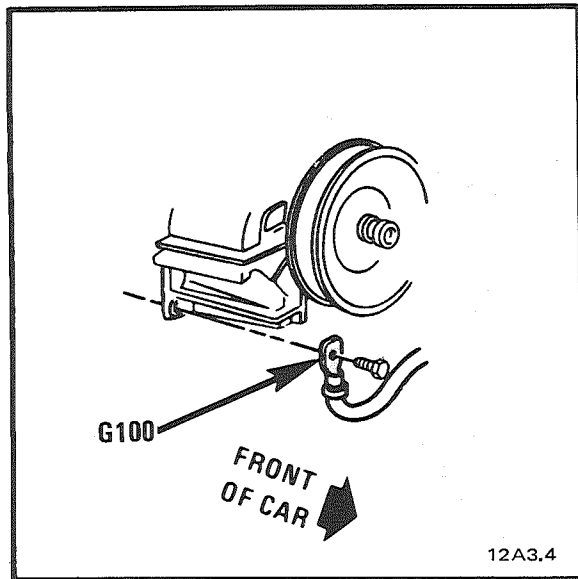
Figure B - Lower LH Front Of VIN F Engine (VIN 8 Similar)
